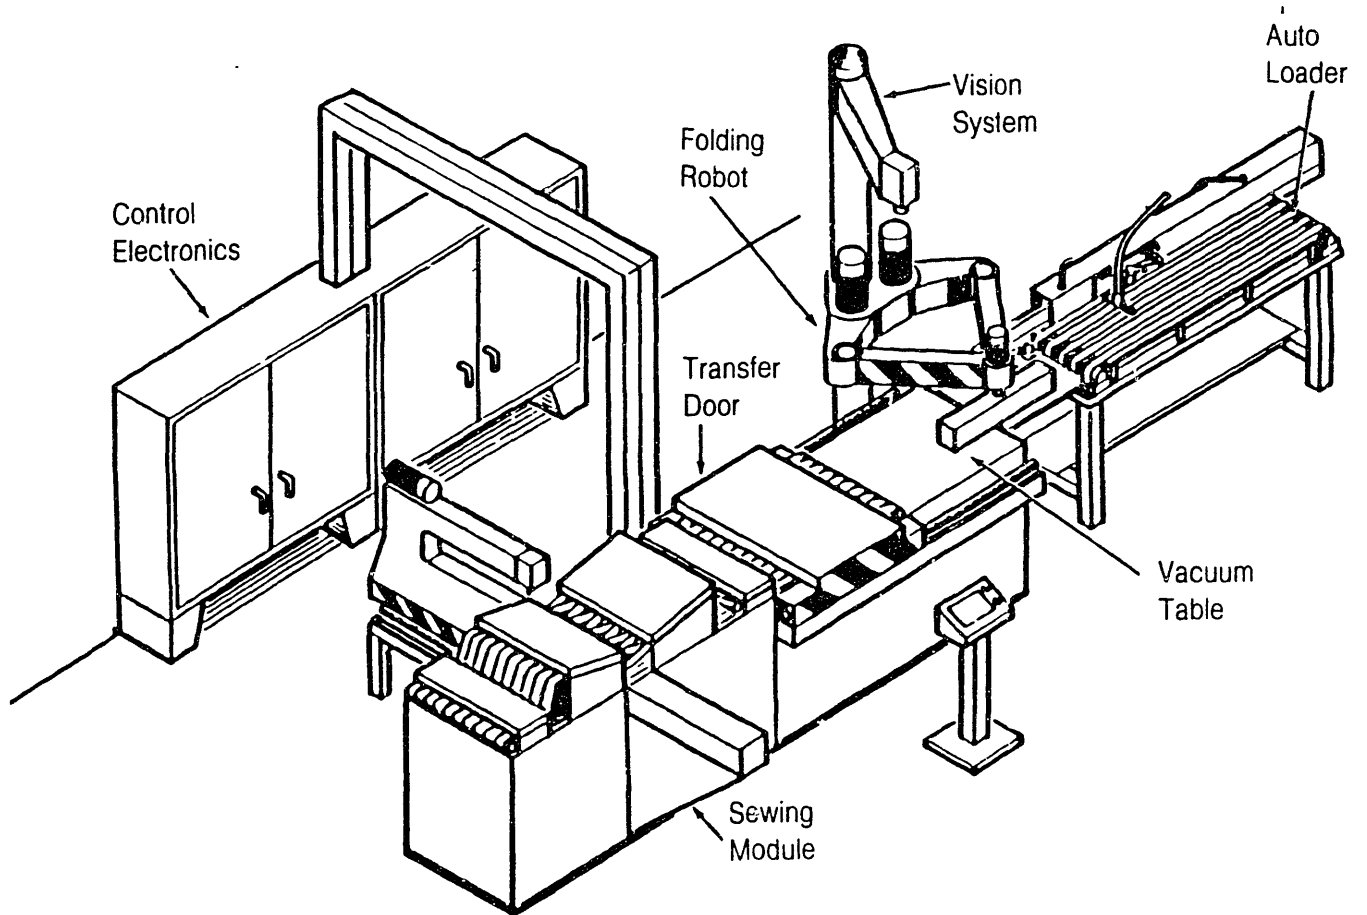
A Schematic of The (TC)2 Sleeve Machine .
